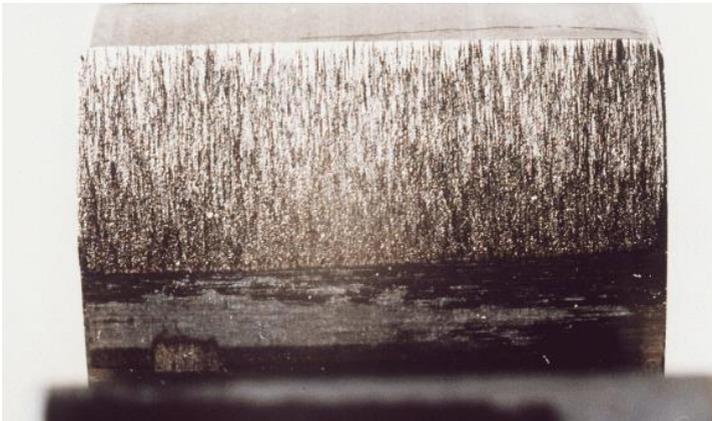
Scuffing (scoring) caused by lubricant failure leading to welding and sliding of the mating gear tooth flanks.
